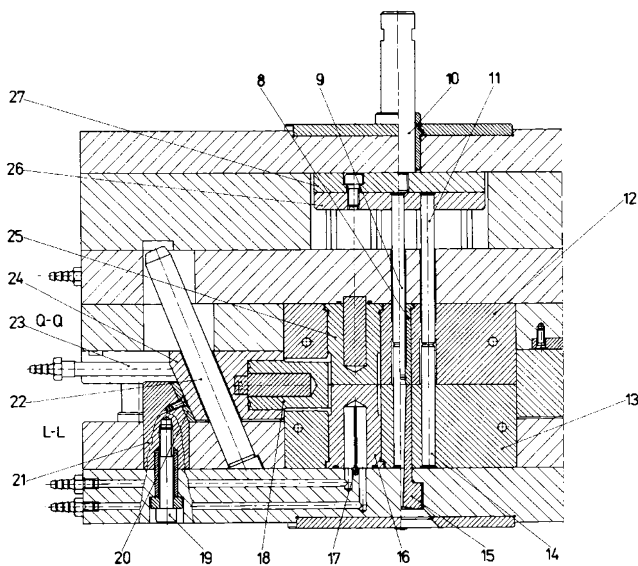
Longitudinal sections L-L (cf. Fig. 10) and Q-Q (cf. Fig. 2)
